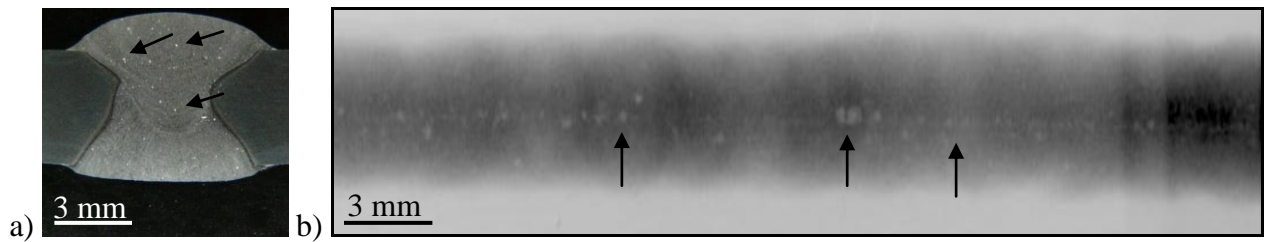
a) Micrograph across the weld seam and b) x-ray photography in top view with process-related weld defects such as pores and incomplete fusions (marked with arrows).
